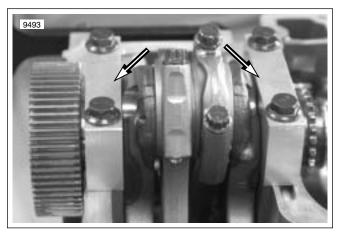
Install Crankshaft Assembly Retainers (HD-45316)
